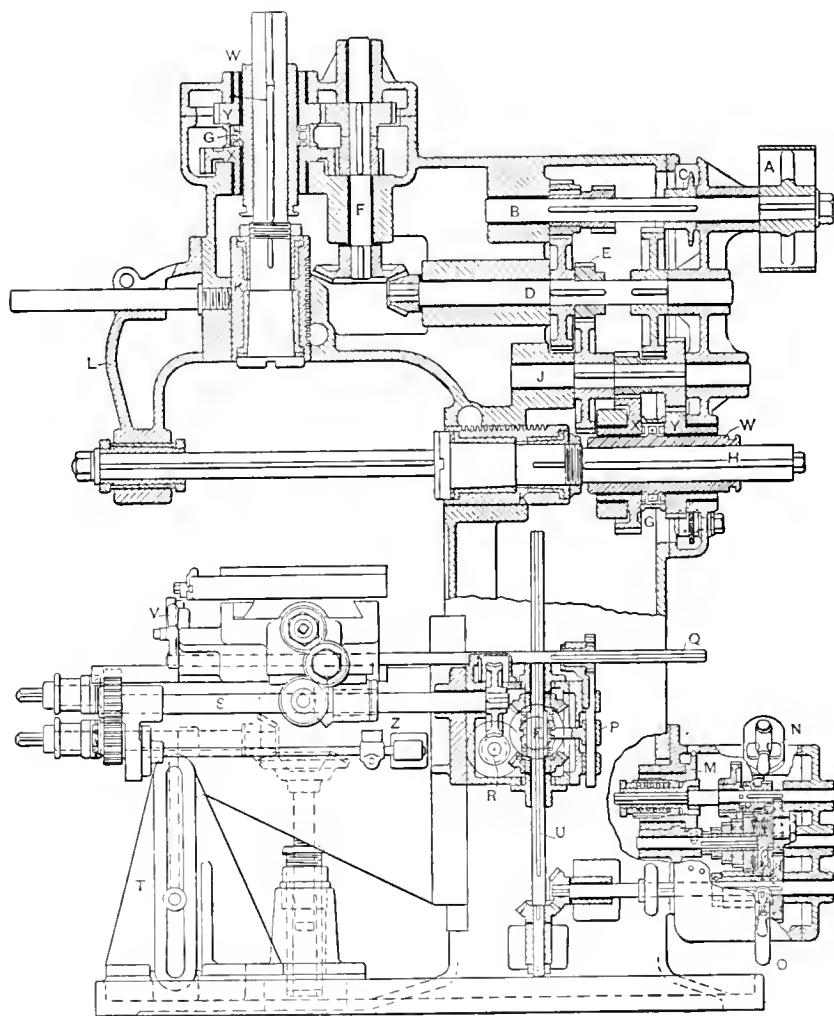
Vertical Section through the Machine showing Driving and Feed Mechanism.
